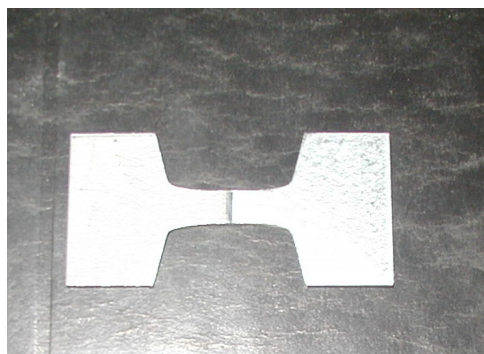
Tailor-welded blank fatigue test specimen.
